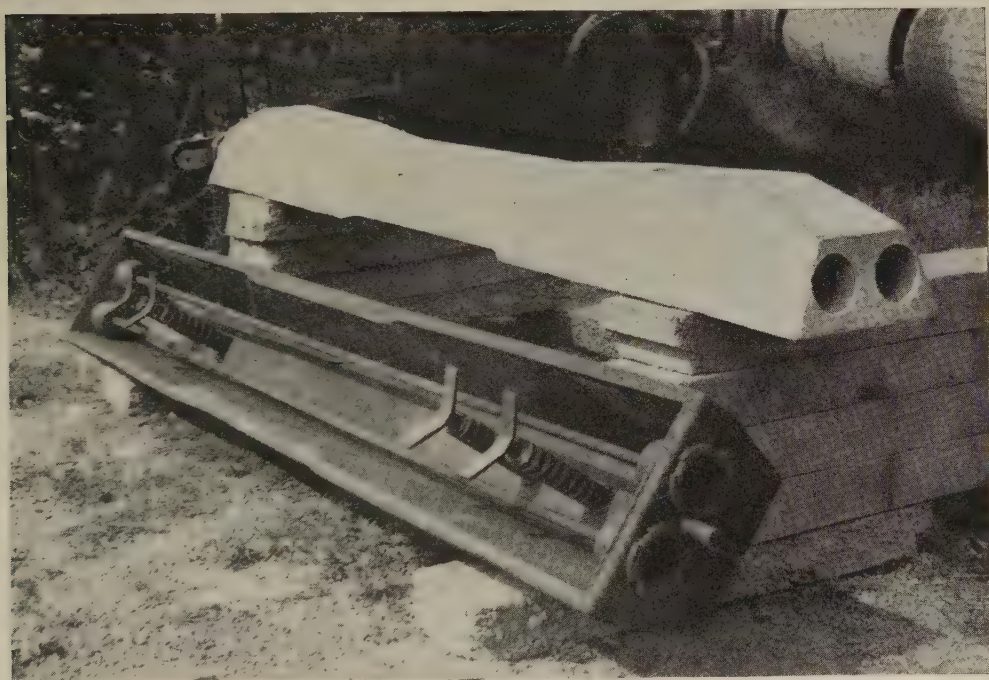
View of B 9 sleeper and mould for this sleeper.
